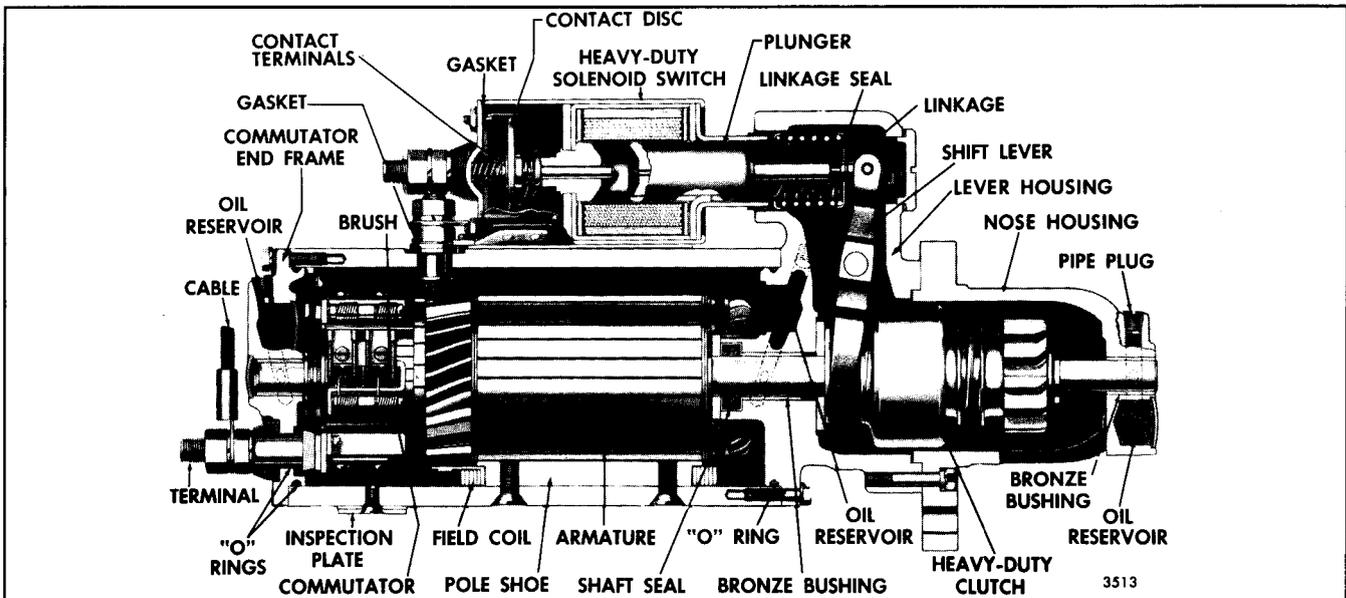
Cross-Section of Motor with Heavy-Duty Clutch
